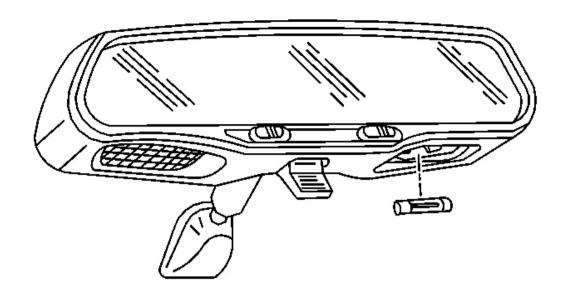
Bulb At Socket Courtesy of GENERAL MOTORS CORP.
